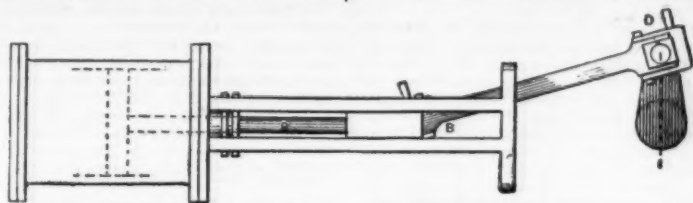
THE WRITER'S METHOD OF DETECTING THE DEFECT WHEN A POUNDING SOUND IS HEARD.
